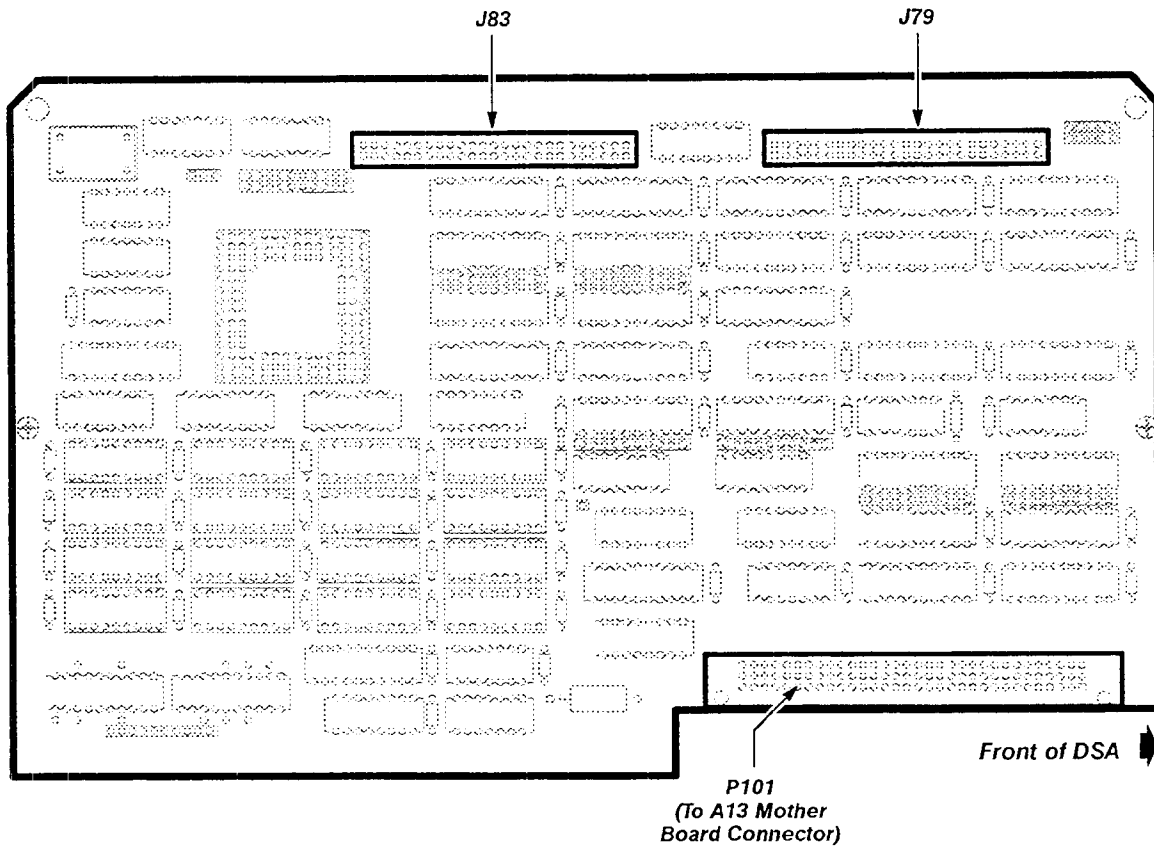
Removing/Replacing the A15 MMU Board
